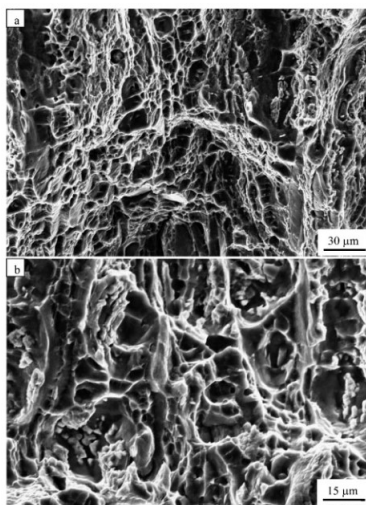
The fracture surface of a 7010 aluminium alloy [47].
